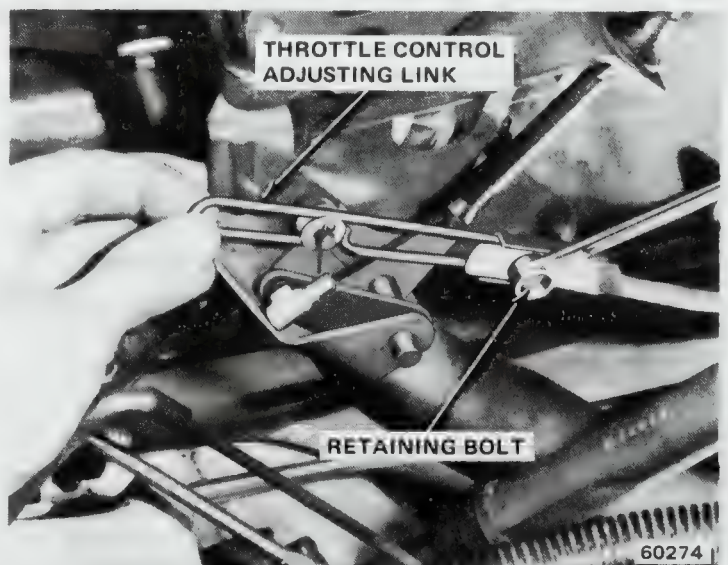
C-29 Tightening Link Retaining Bolt—Four-Cylinder and Six-Cylinder Engines
